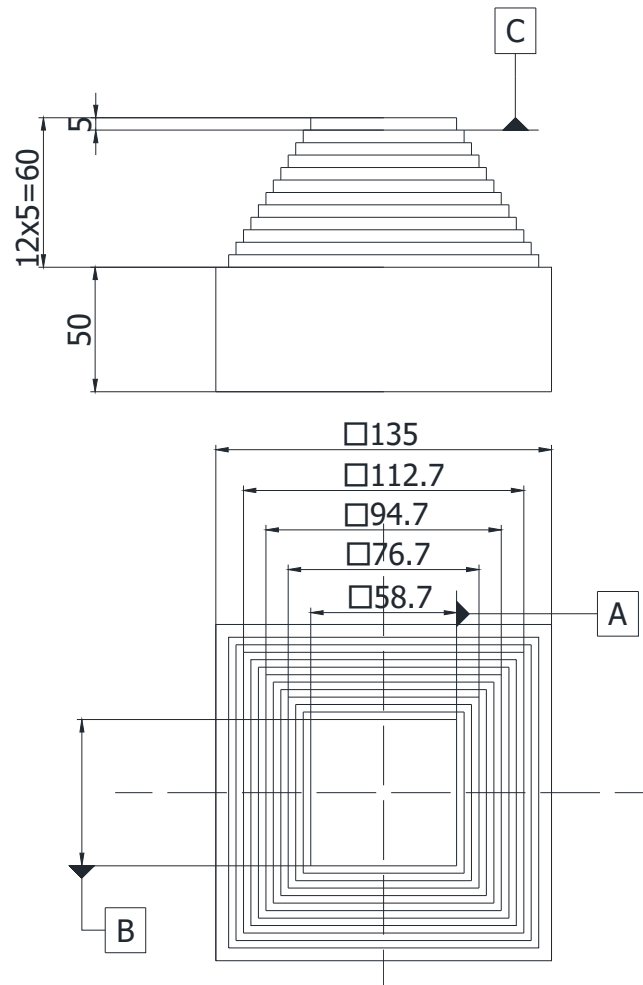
Finished test piece geometry. A, B, and C represent the datum planes (see Section 3.2).
